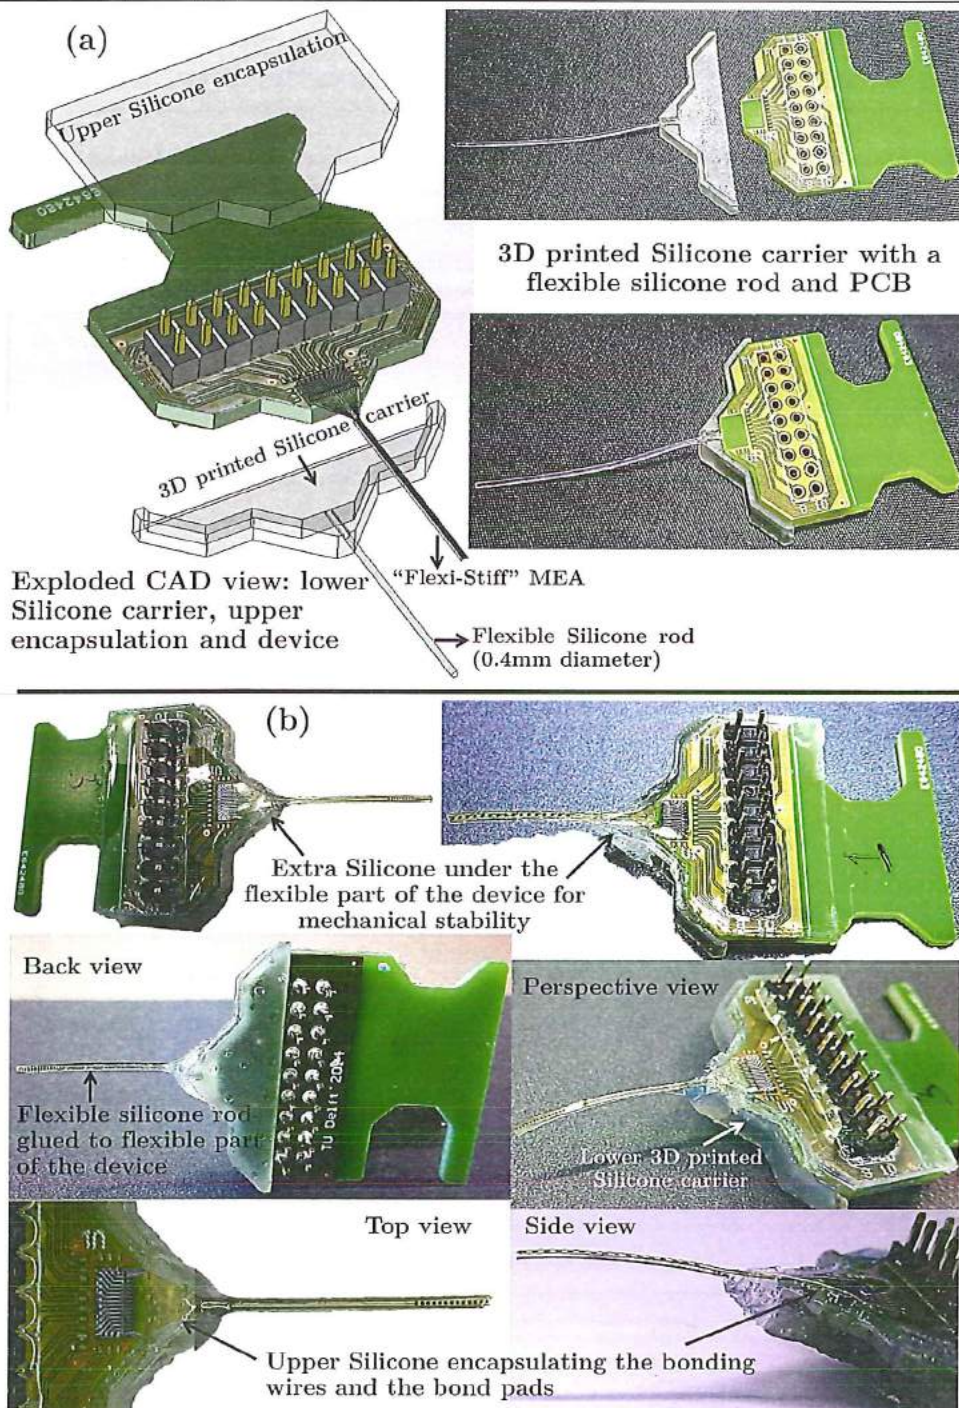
3D printed Silicone carrier: (a) CAD impression and manufactured 3D printed Silicone parts; (b) Final assembly of “Flexi-Stiff” device after gluing 3D printed Silicone carrier along with the flexible solid silicone tube.
